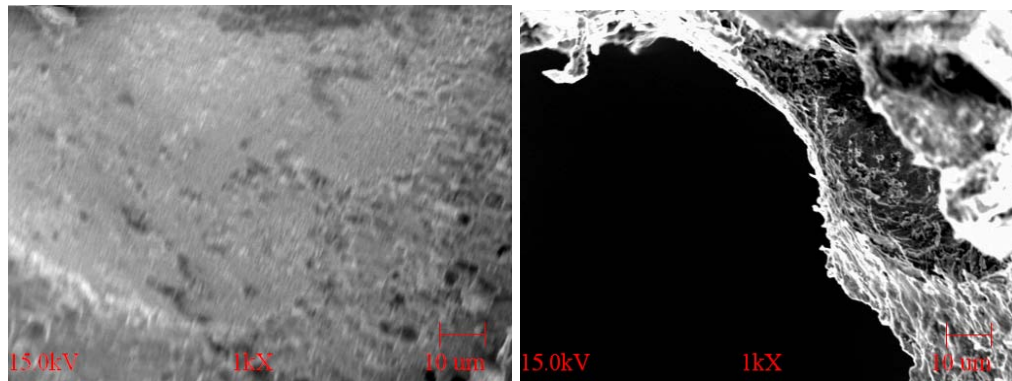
Surface generated by Ni coated tungsten (left) and by uncoated tool after a couple of machining operations (right)
